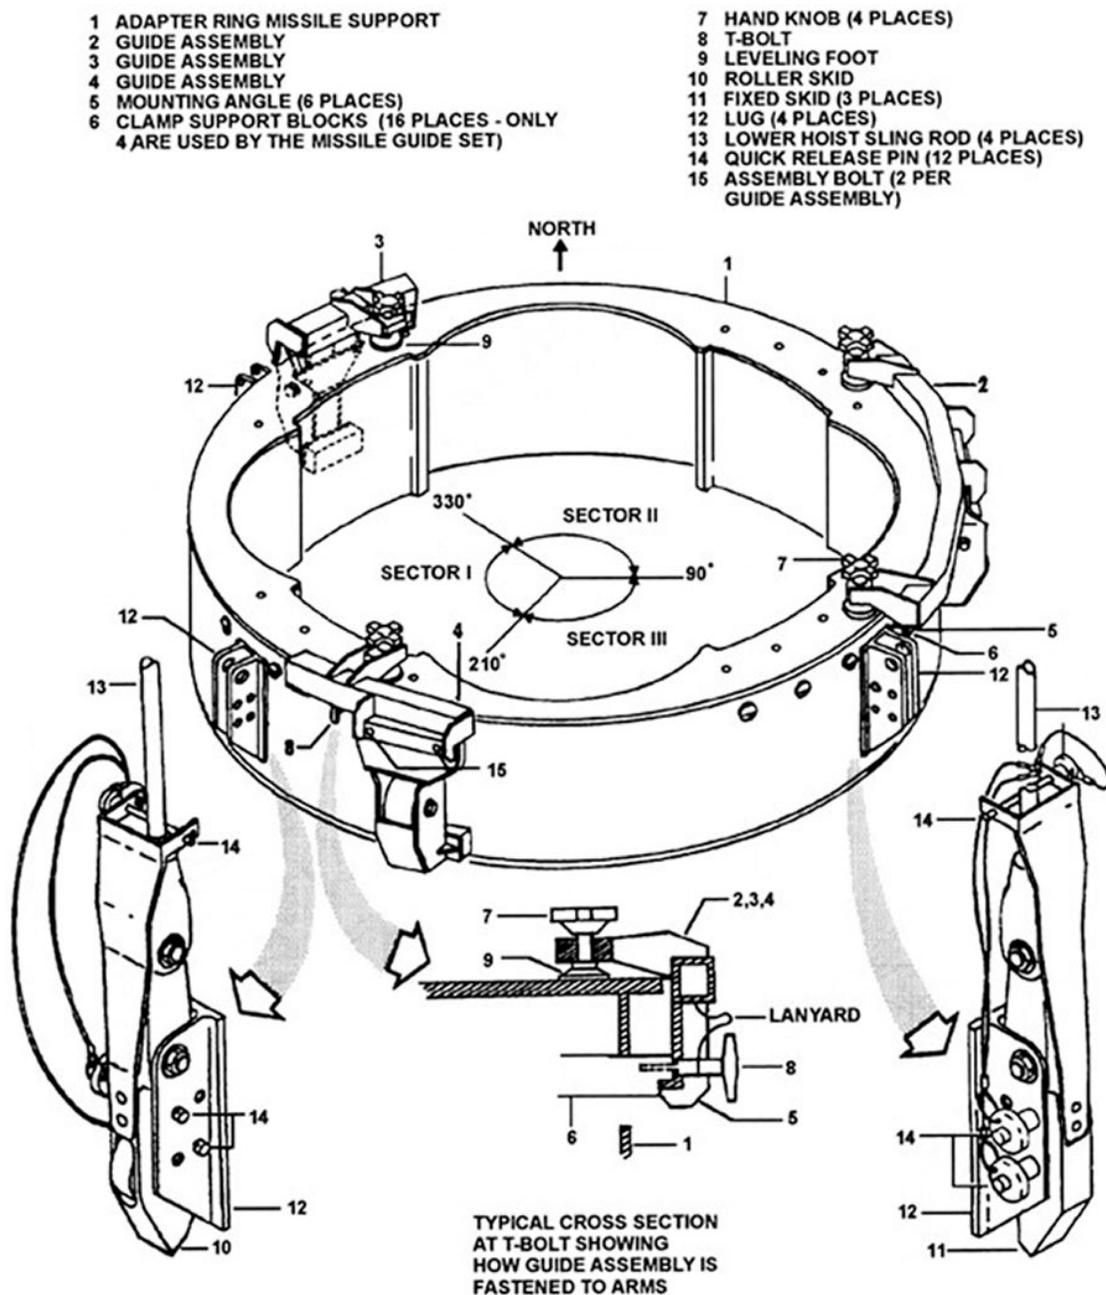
Adapter ring missile support and missile emplacement guide set.
